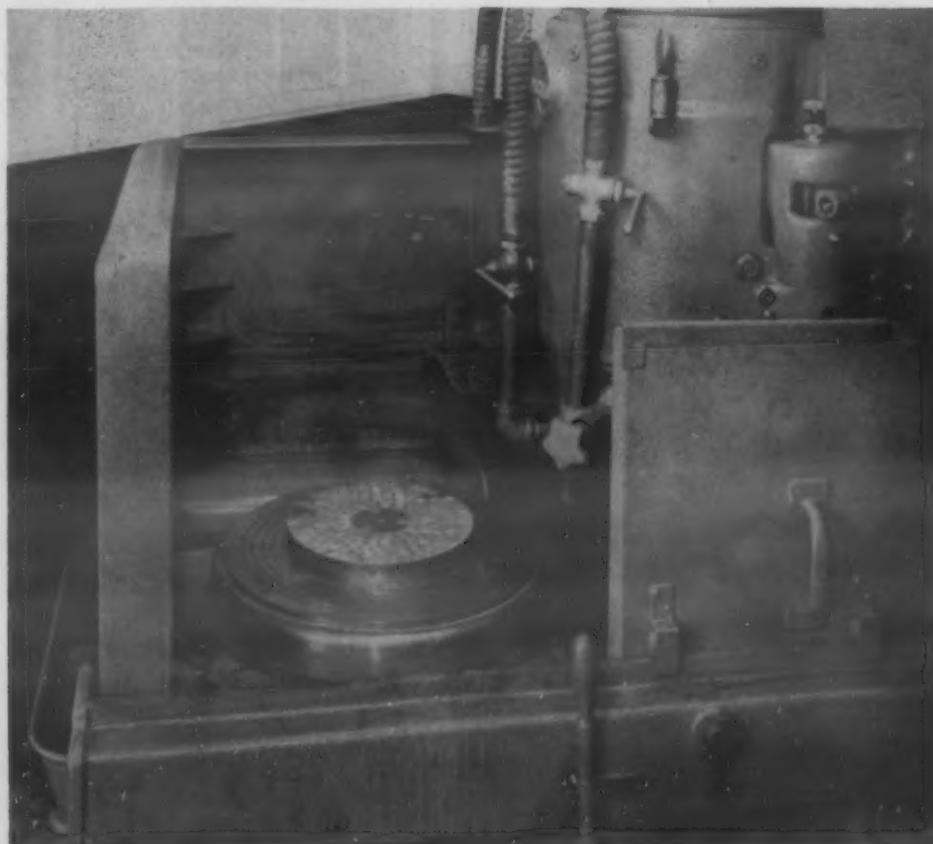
Rotary table surface grinder set up for grinding quartz crystals for radio frequency generators. (Courtesy: Blanchard Machine Co.)
